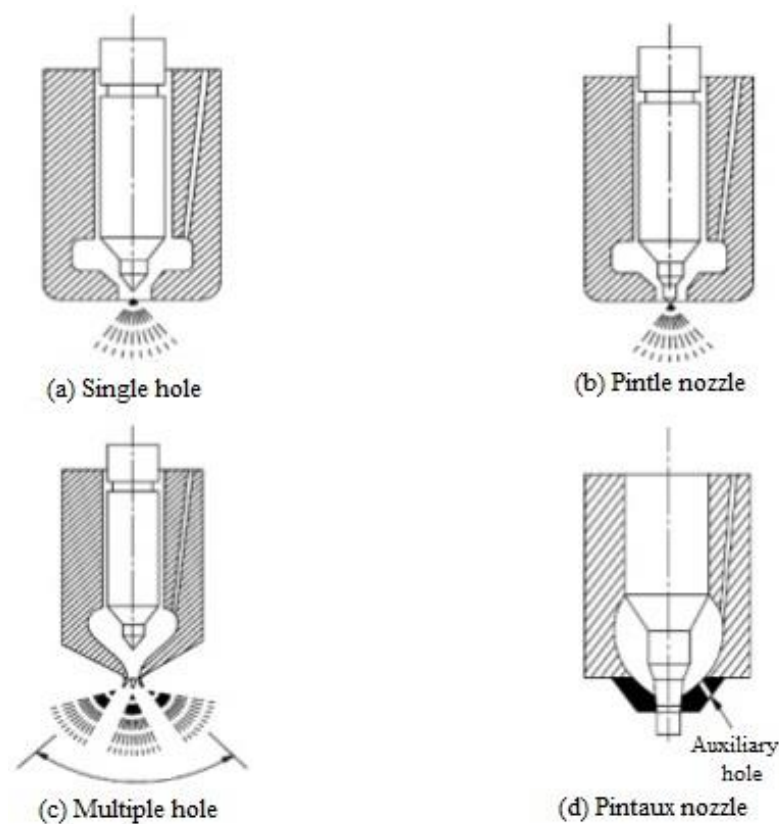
Types of nozzles: Single hole, pintle hole, multiple hole and pintaux [83]
